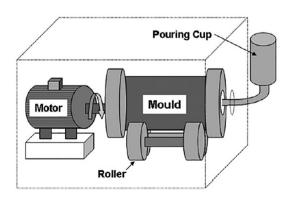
Schematic diagram of the Centrifugal casting machine [15].
